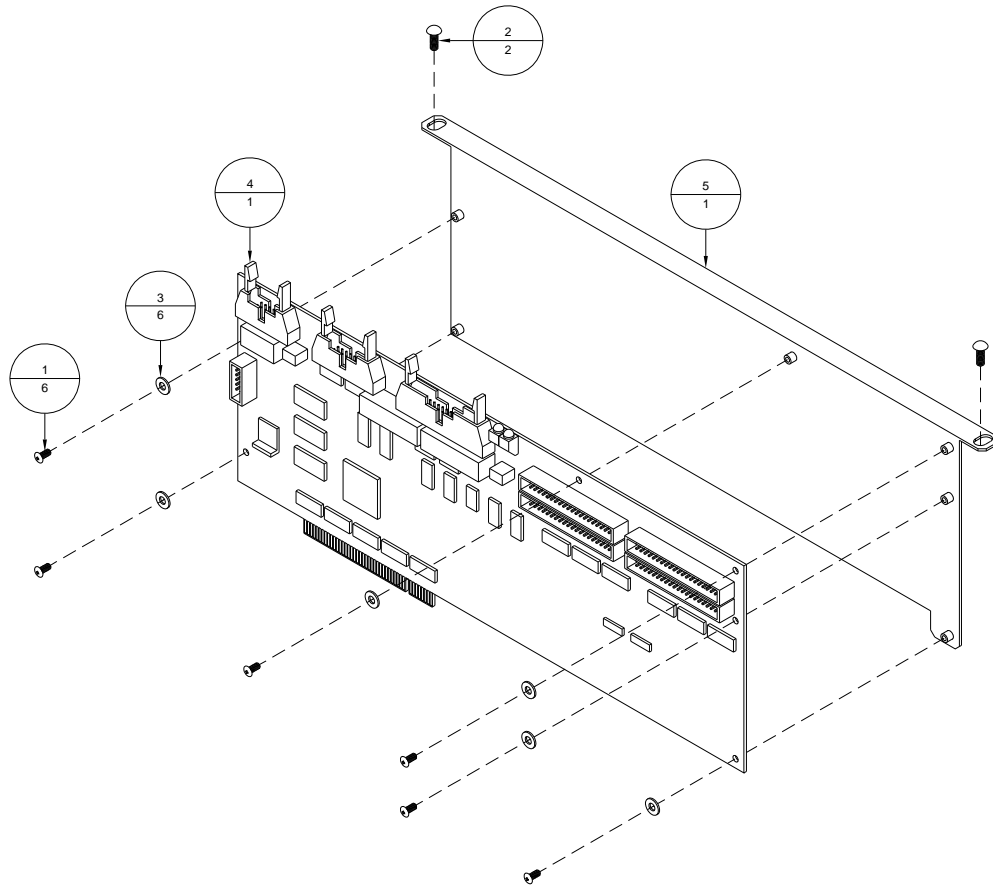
9104135A – Image Accelerator Card Assembly, PCM
